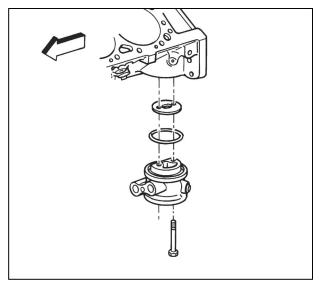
Oil Filter Adapter Installation With Oil Cooler (Typical)
